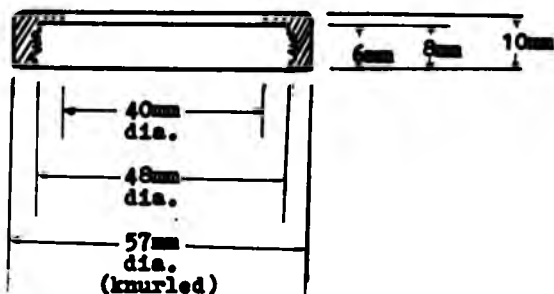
Dimensions of clamp B in Fig. 4.4
